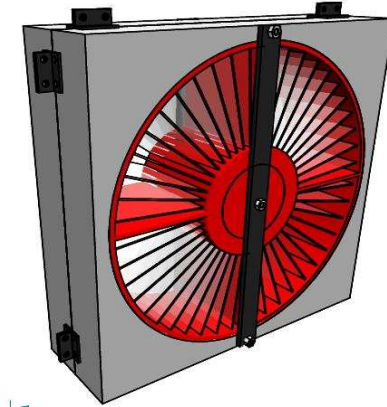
3D CAD model of the radial blade rotary desiccant wheel design
